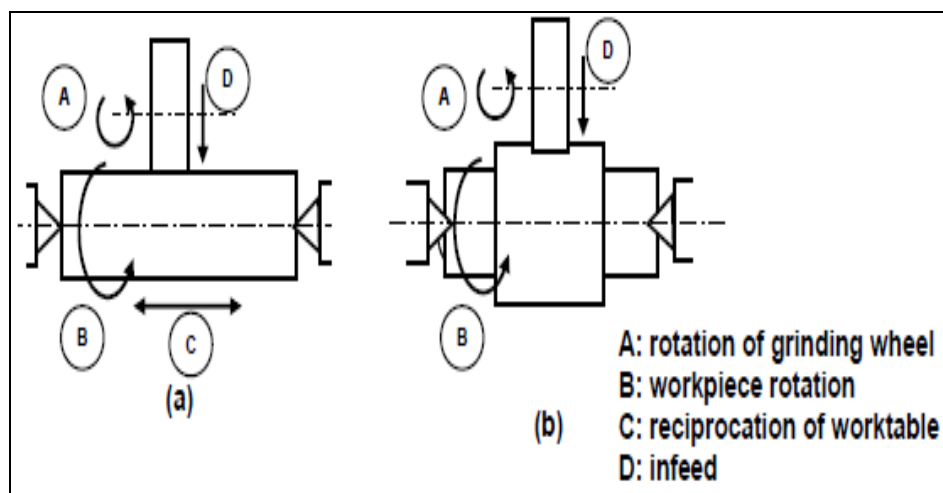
Cylindrical (a) Traverse grinding (b) Plunge grinding
